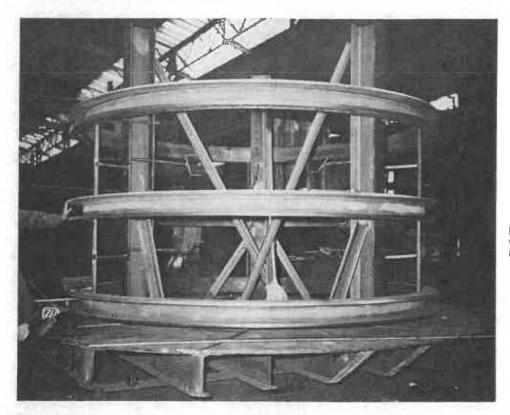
View of assembly fixture with three rings in place prior to arrival of shell section.
